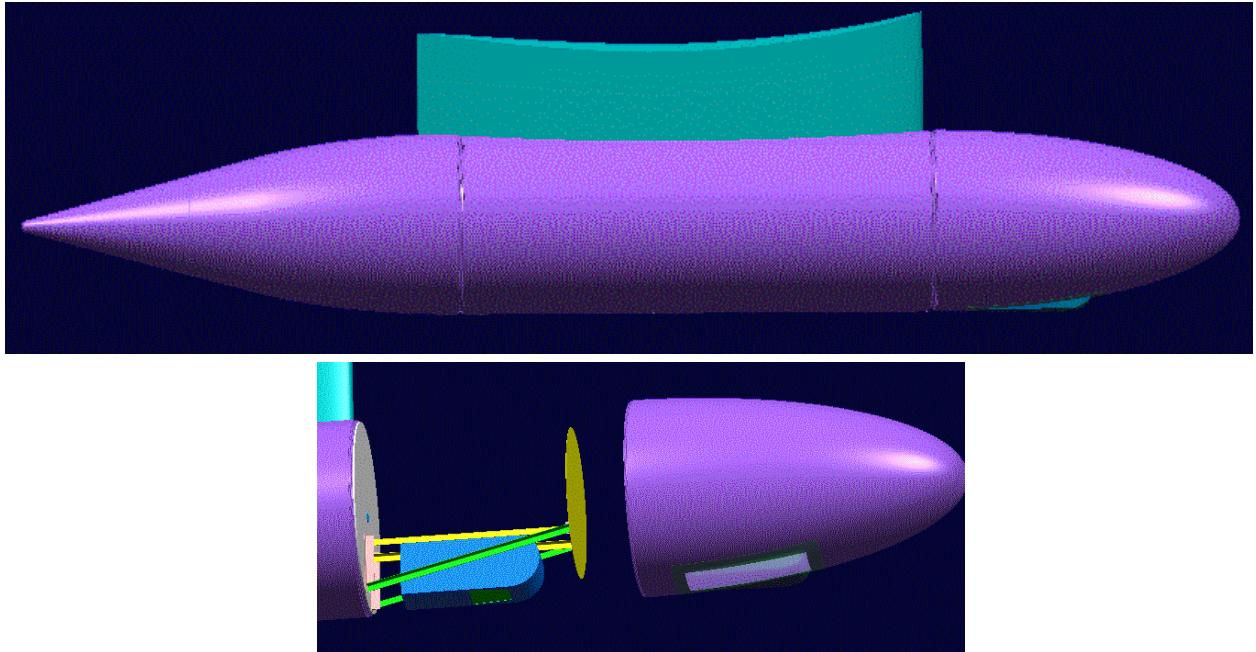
Wing Installation, Fuel Tank Mounted SFMR, Nose Cone Removed
